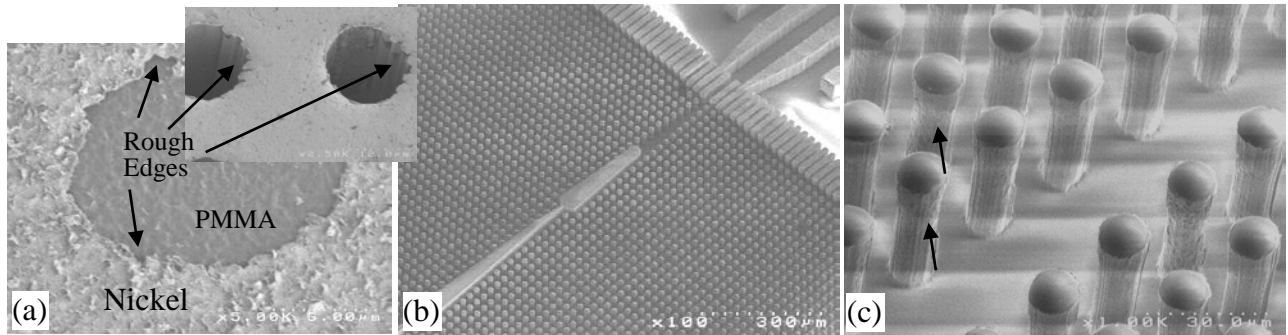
(a) Mold insert hole with rough edge before CMP, inset shown is after CMP (b) molded PC chip posts & exit channels (c) magnified view of posts showing narrowing of posts column due to pullout effect [11]
